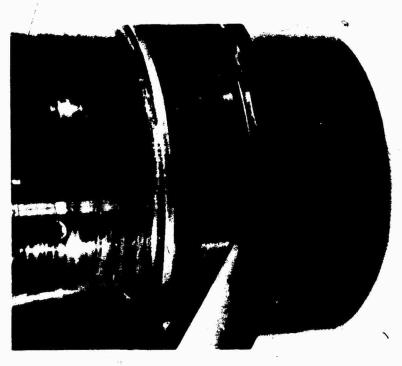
Bearing Roller End Wear on Freewheeling Inner Race (P/N 114D2093-3).
